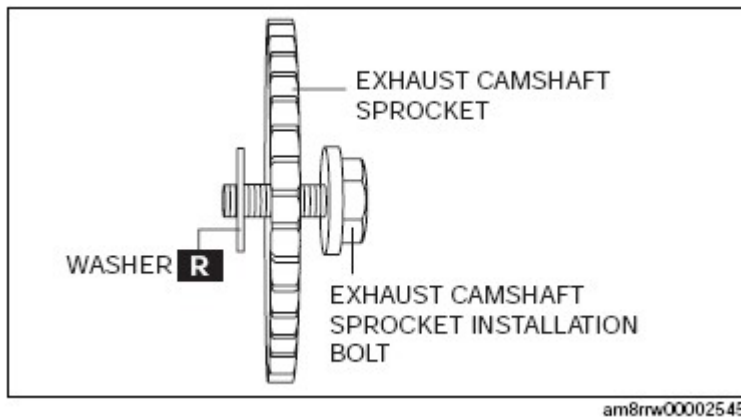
Identifying Exhaust Camshaft Sprocket Installation Bolt, Exhaust Camshaft Sprocket, And Washer
